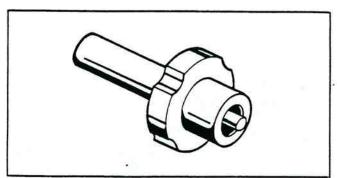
Alignment Tool 20-157 (Nut-Mounted Cam Gear).
